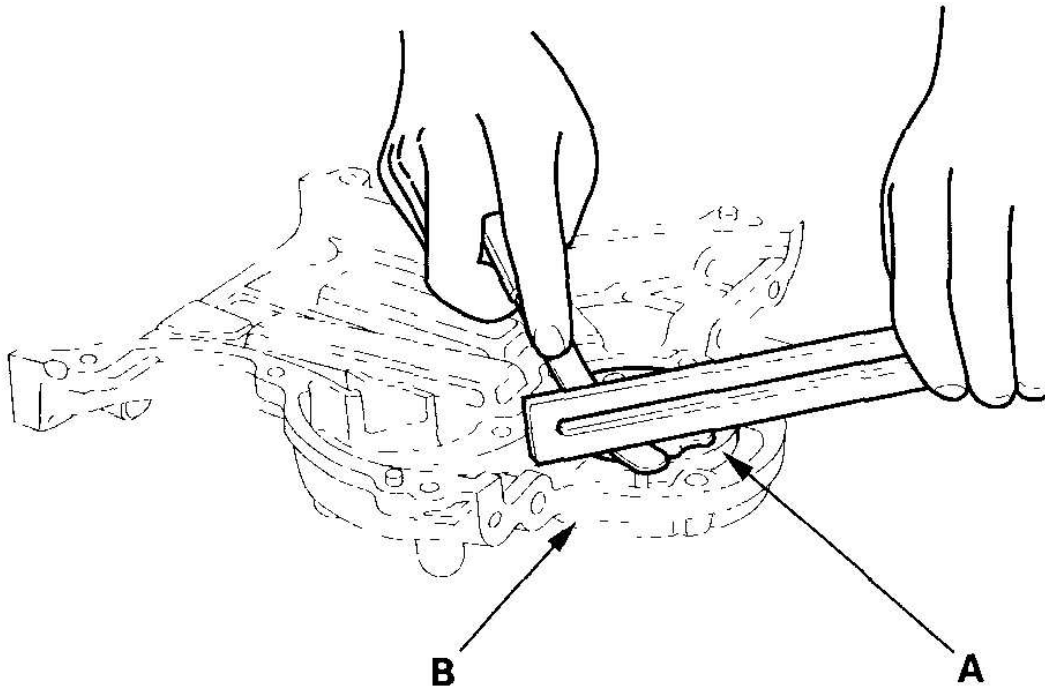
Checking Clearance Between Inner Rotor And Outer Rotor
